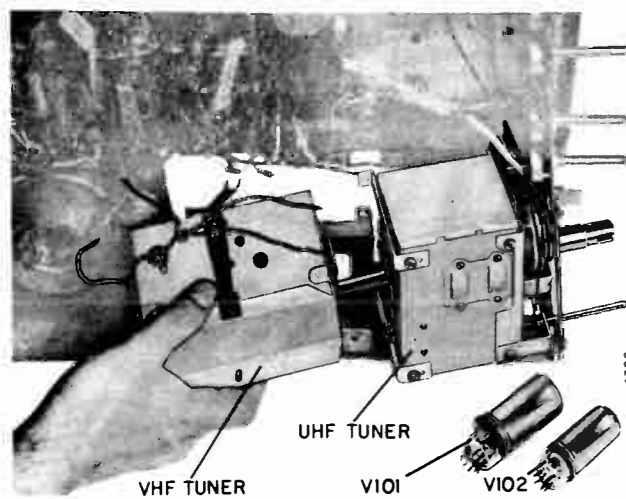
Bottom View of TV Chassis Showing Removal of VHF Tuner.
